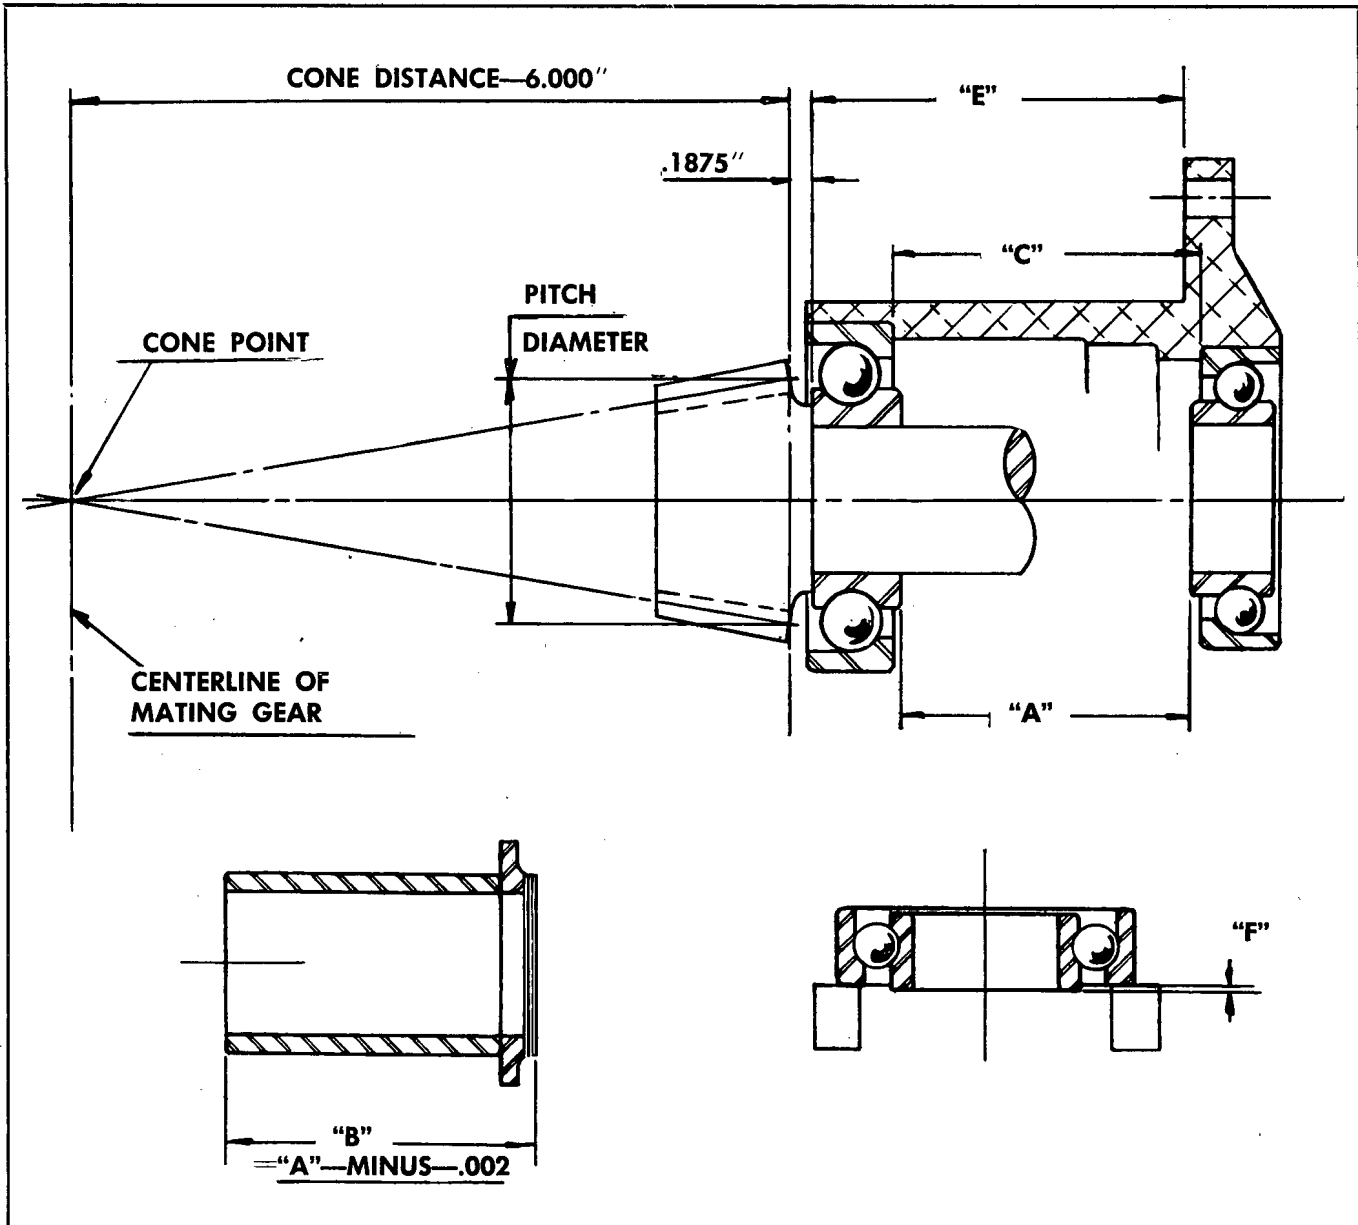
Bevel Gear Shaft Assembly Dimensions
